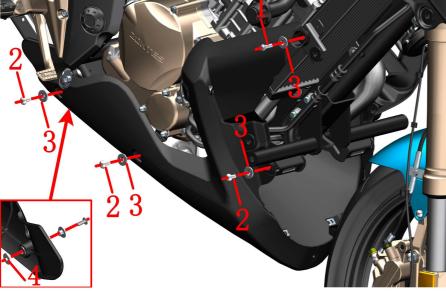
SURROUNDING		Lower shroud assembly 1	CHK	Q
